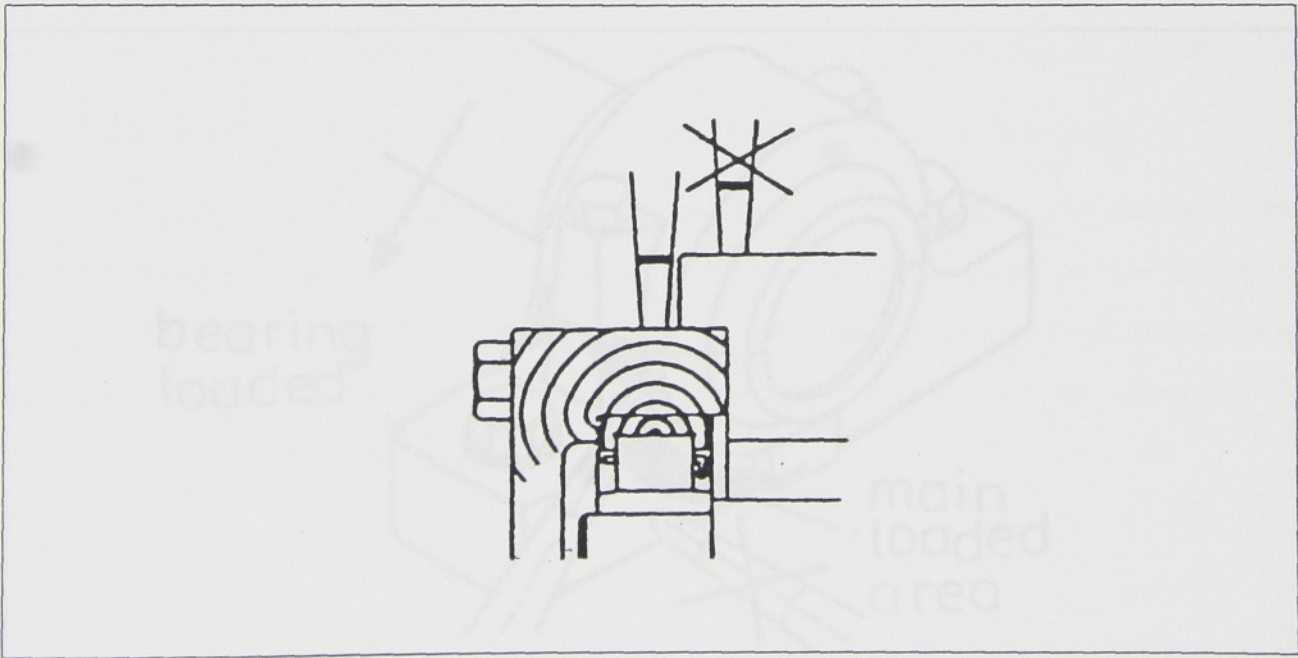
In signal path, there can be only one disconnecting material and that, only between the bearing and the bearing box.
